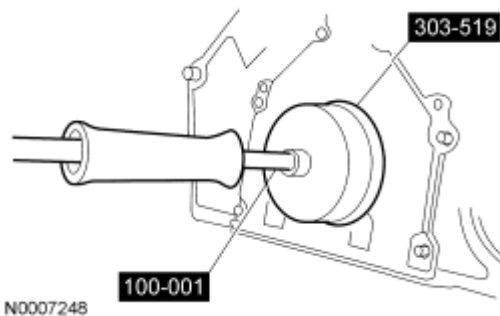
Identifying Slide Hammer And Crankshaft Rear Seal Remover
